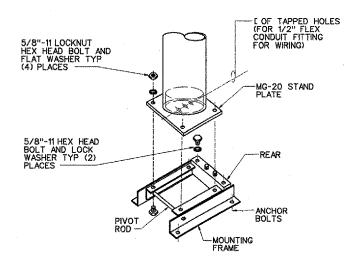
MOUNTING STAND ASSEMBLY MG-20
